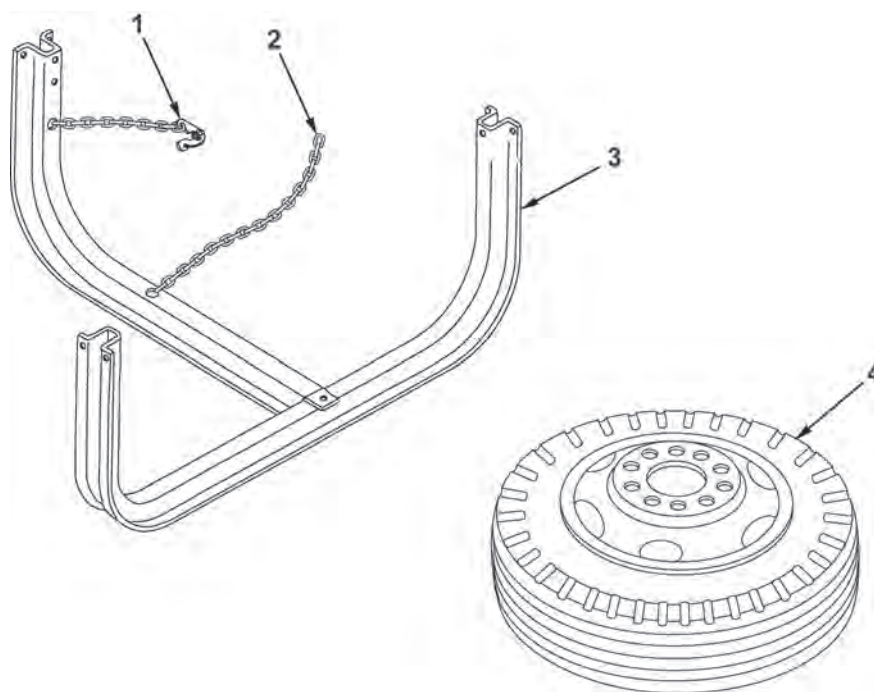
Spare Tire and Wheel Assembly Removal and Installation.
